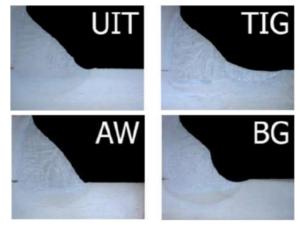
Weld to geometries for "as welded" condition and after post treatment (toe grinding UIT, also called UNP, and TIG dressing)¹¹
